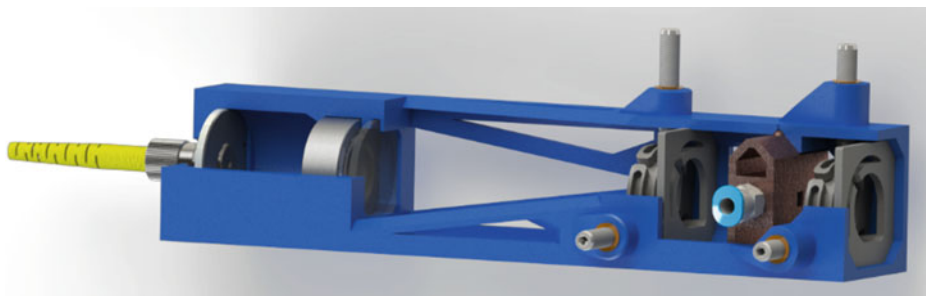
CAD model of the additively manufactured optomechanic for a laser system
